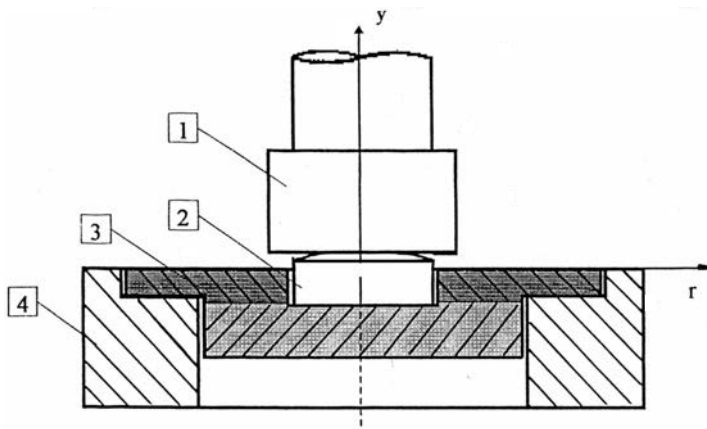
Test specimen and diagram of the ram tensile test stand, where: 1 – pusher, 2 – stamp, 3 – test specimen, 4 – base.
